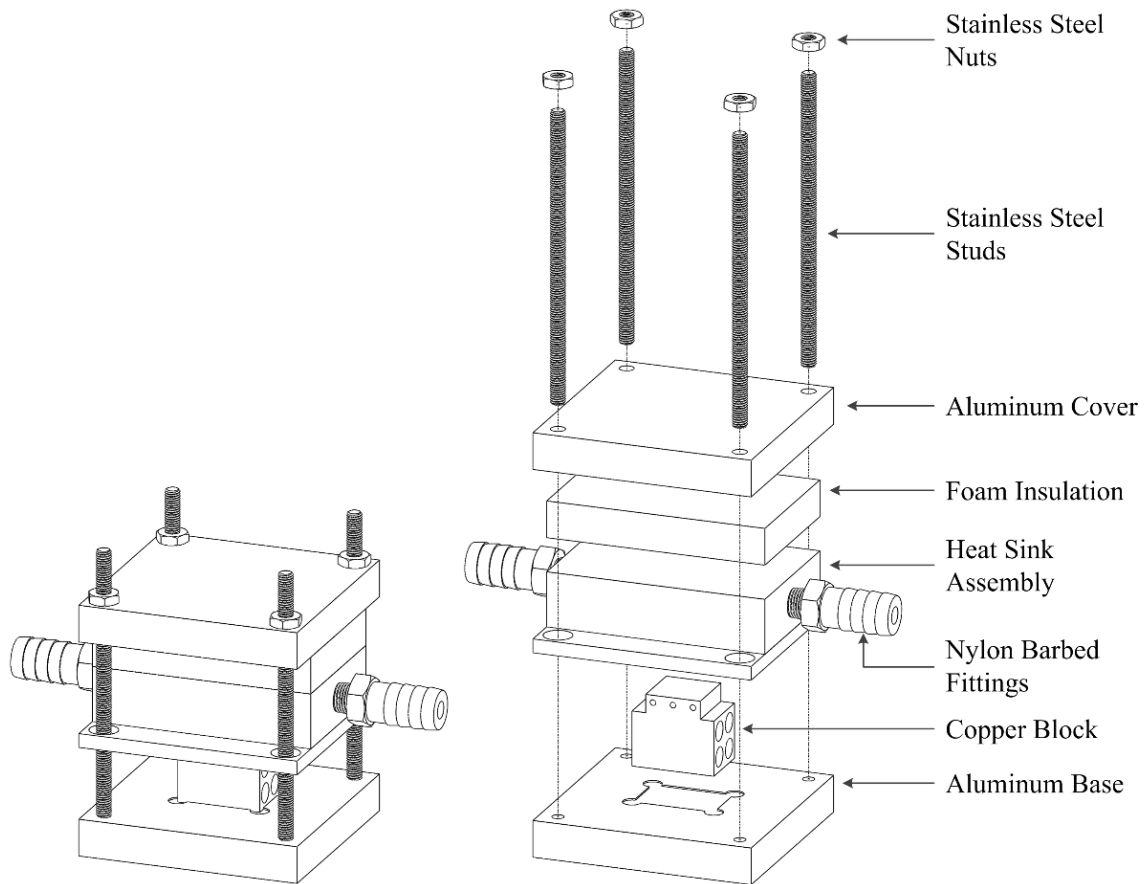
Schematic of Test Section 1 in collapsed and exploded configurations
